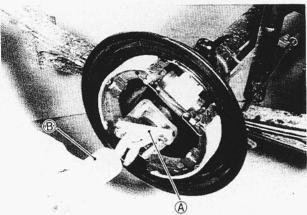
(A) Special Tool (Rear Axle Remover 09922-66010) (B) Special Tool (Sliding Hammer 09942-15510)
